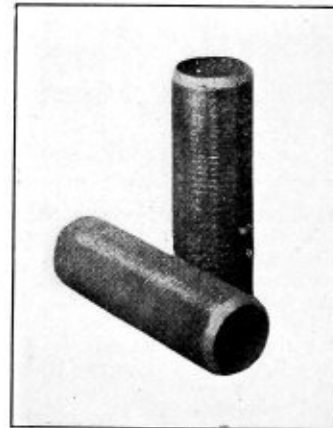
Two Safe-Ends Ready for Welding
